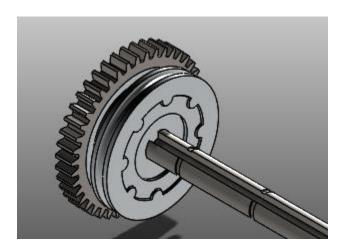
, Output Shaft, Synchronizing Hub and Sliding Sleeve Sub-assembly
